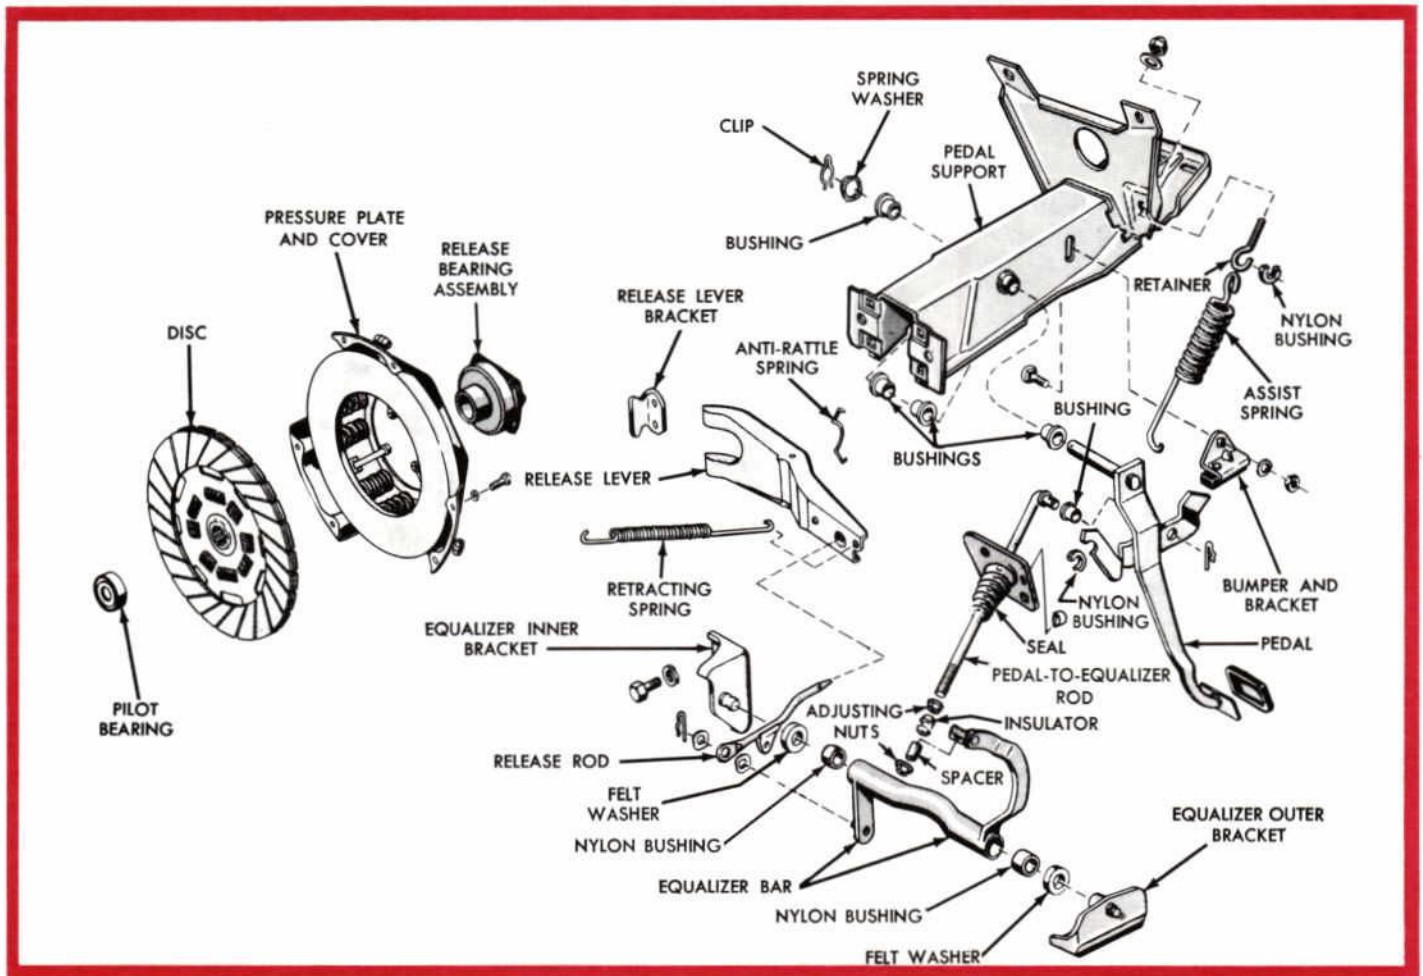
Ford Clutch And Linkage Assembly Parts Identification
